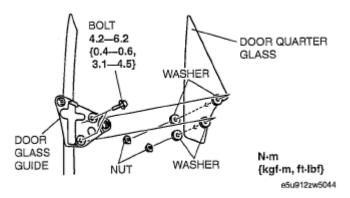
Identifying Door Quarter Glass Remove/Install Components With Torque Specifications Courtesy of MAZDA MOTORS CORP.
